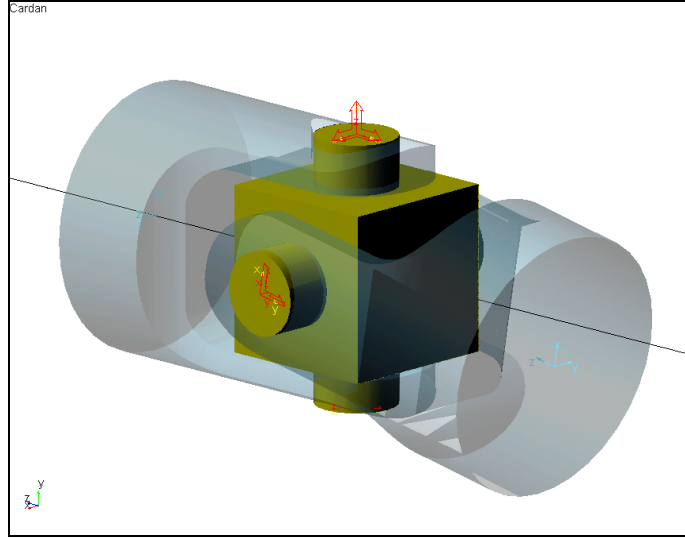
Universal joint modeled with rigid bodies and bearing forces.
